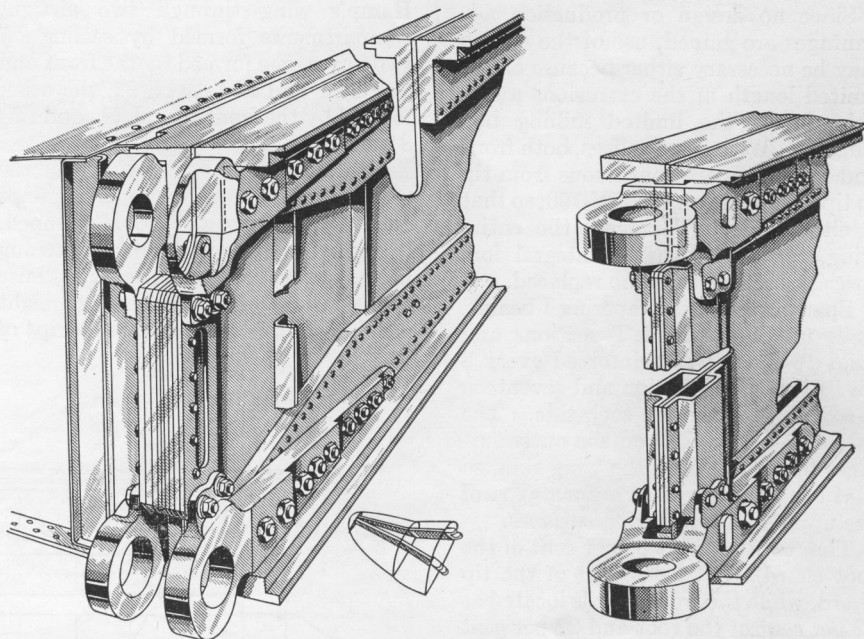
Cutaway views of the root fittings of a Hawker Tempest V front spar (left) and rear spar (right), with inset sketch showing relative positions in the wing. Both spars have T-section booms built up of L-section extrusions riveted to heavy-gauge sheet web.
